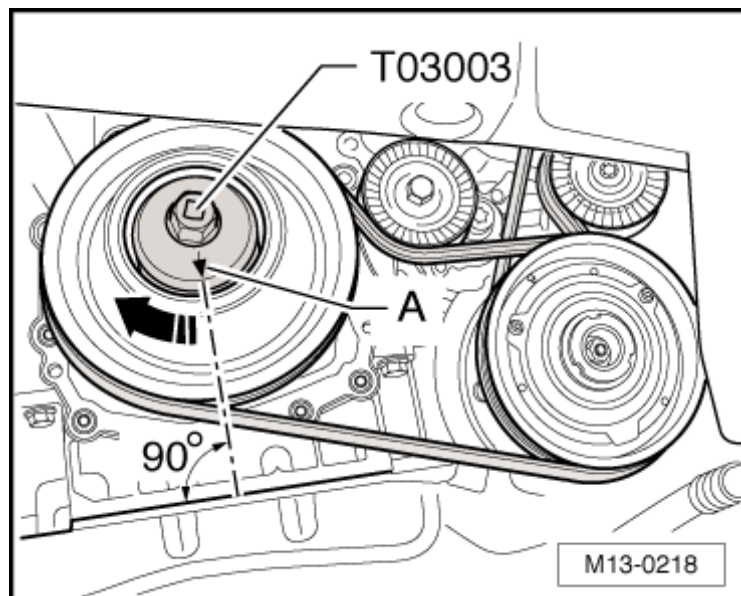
Identifying Crankshaft Turned Only In Direction Of Engine Rotation
